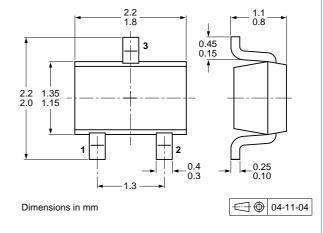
Package outline PDTC114YU (SOT323/SC-70)
